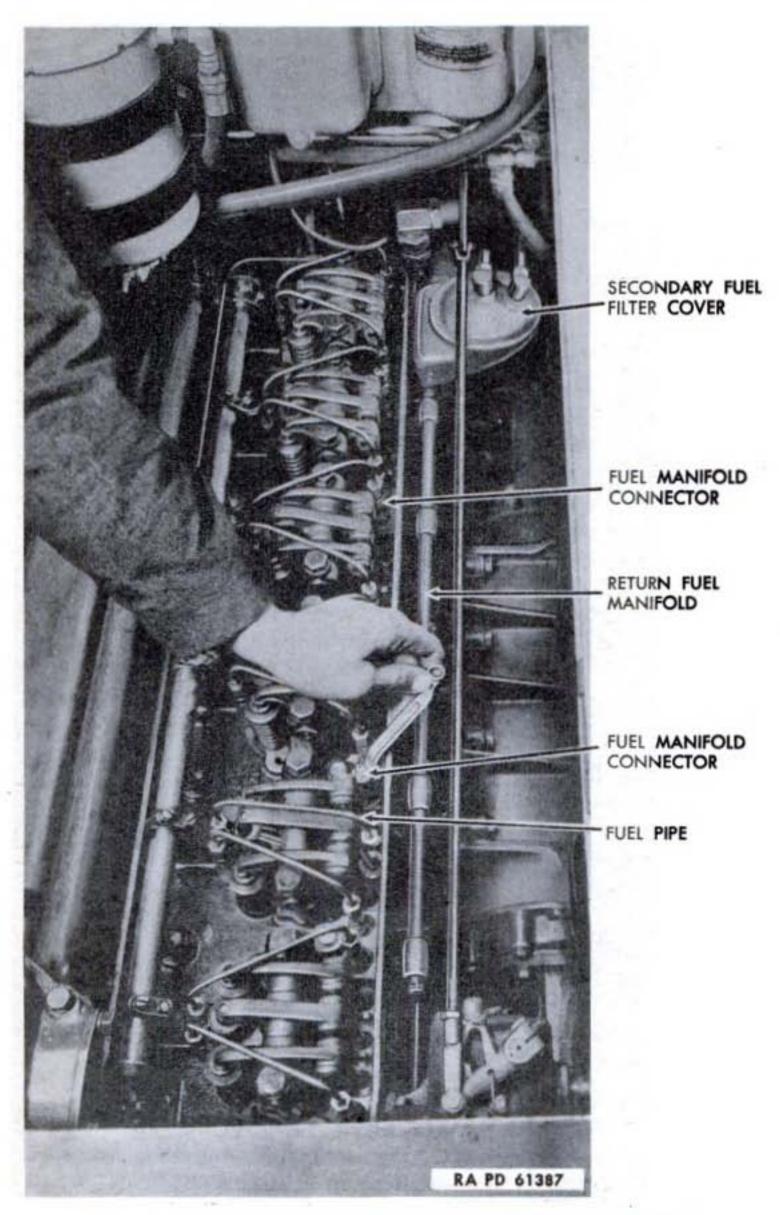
Fuel Pipes and Fuel Manifold Connectors
